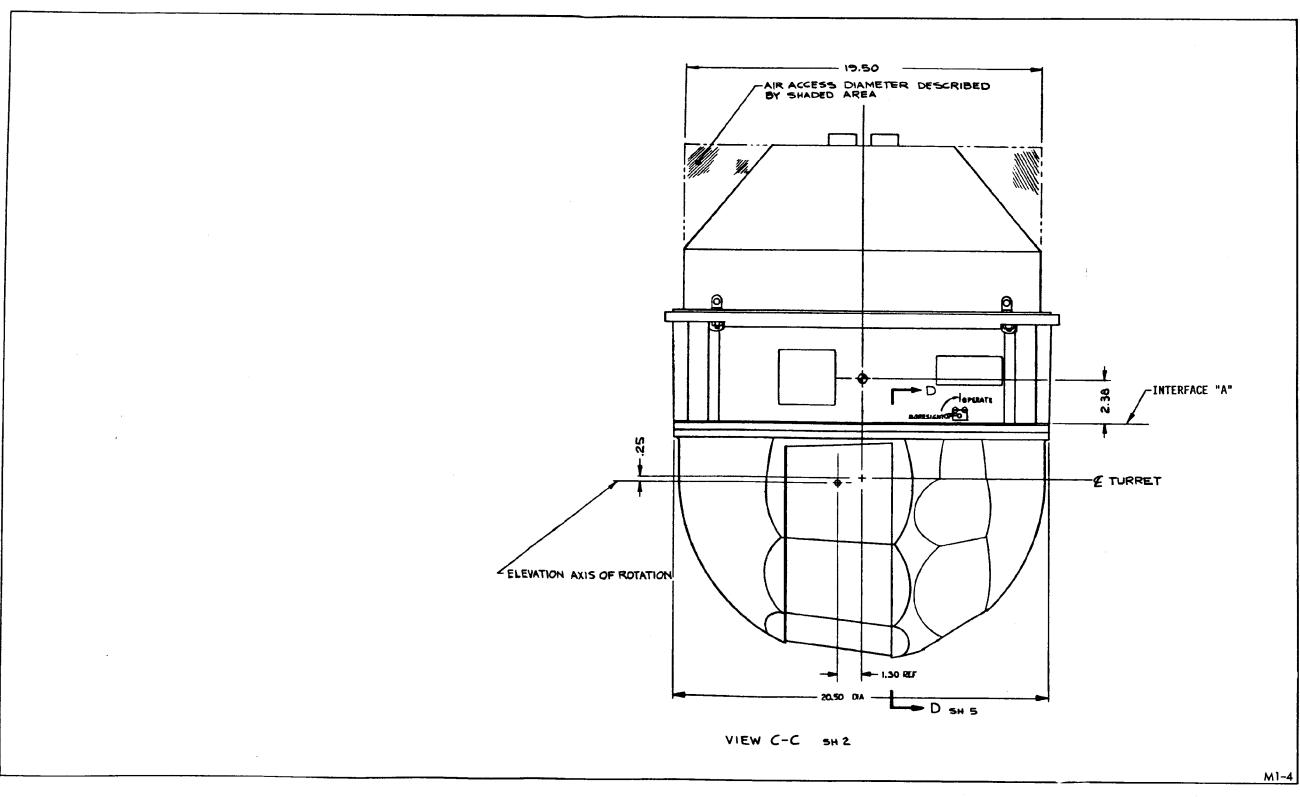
Receiver converter, outline drawing. (sheet 4 of 5)
